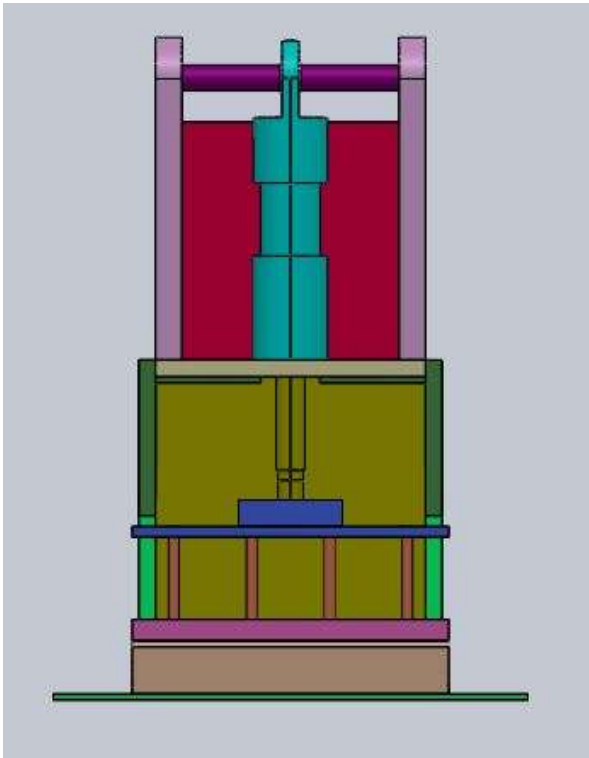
Assembly Front View of Mini Hydraulic press Machine
